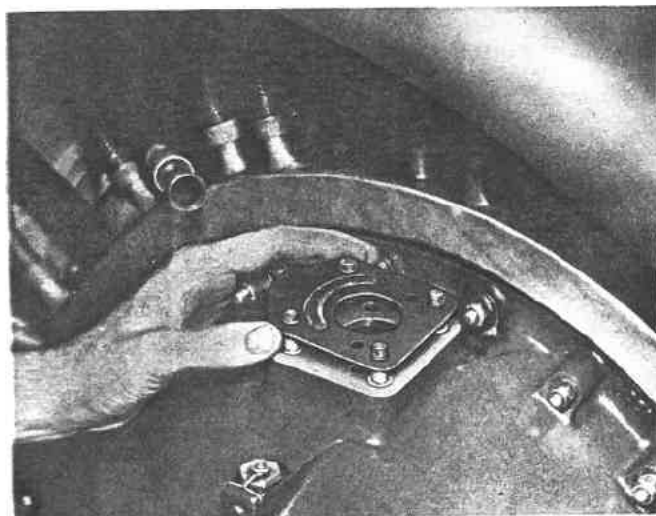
Placing Governor Mounting Gasket on Mounting Pad
